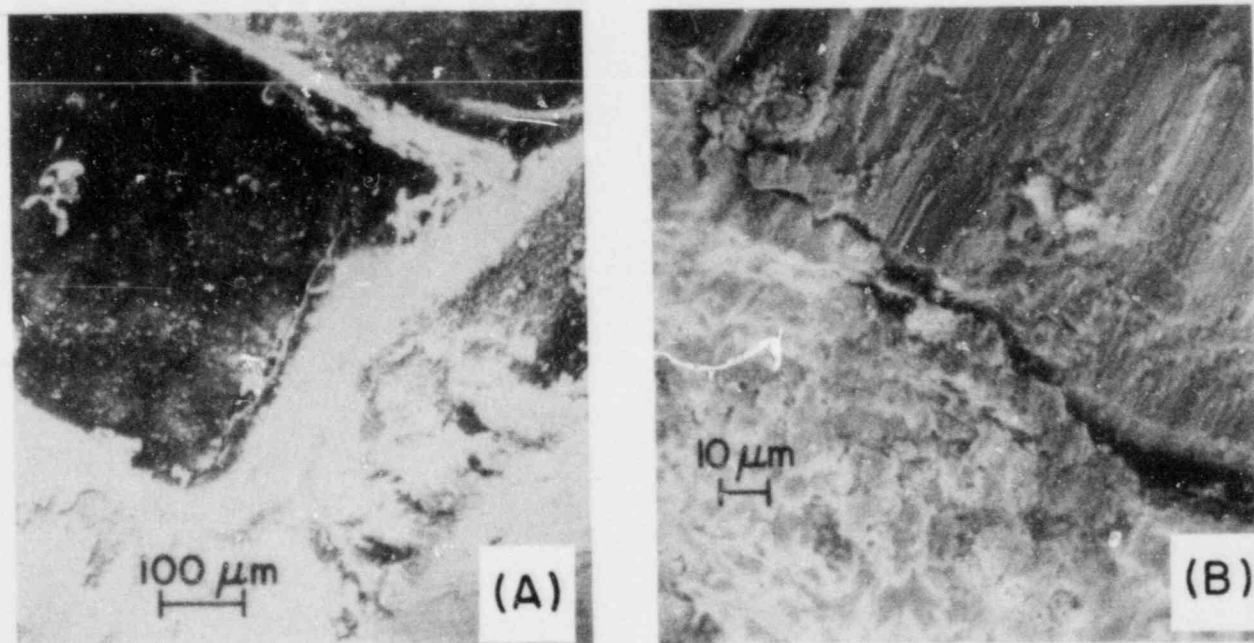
Crack Morphologies of the Inner Surface of Specimen 217B2D after Fracture at 325°C under Expanding-Mandrel Loading. (A) Crack parallel to axial direction located at the edge of the expanding ring; (B) higher magnification of the crack.
